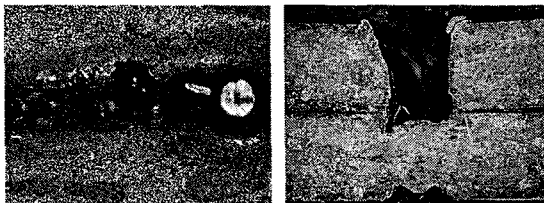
High speed images for autogenous laser lap welding of zinc-coated steel sheets
